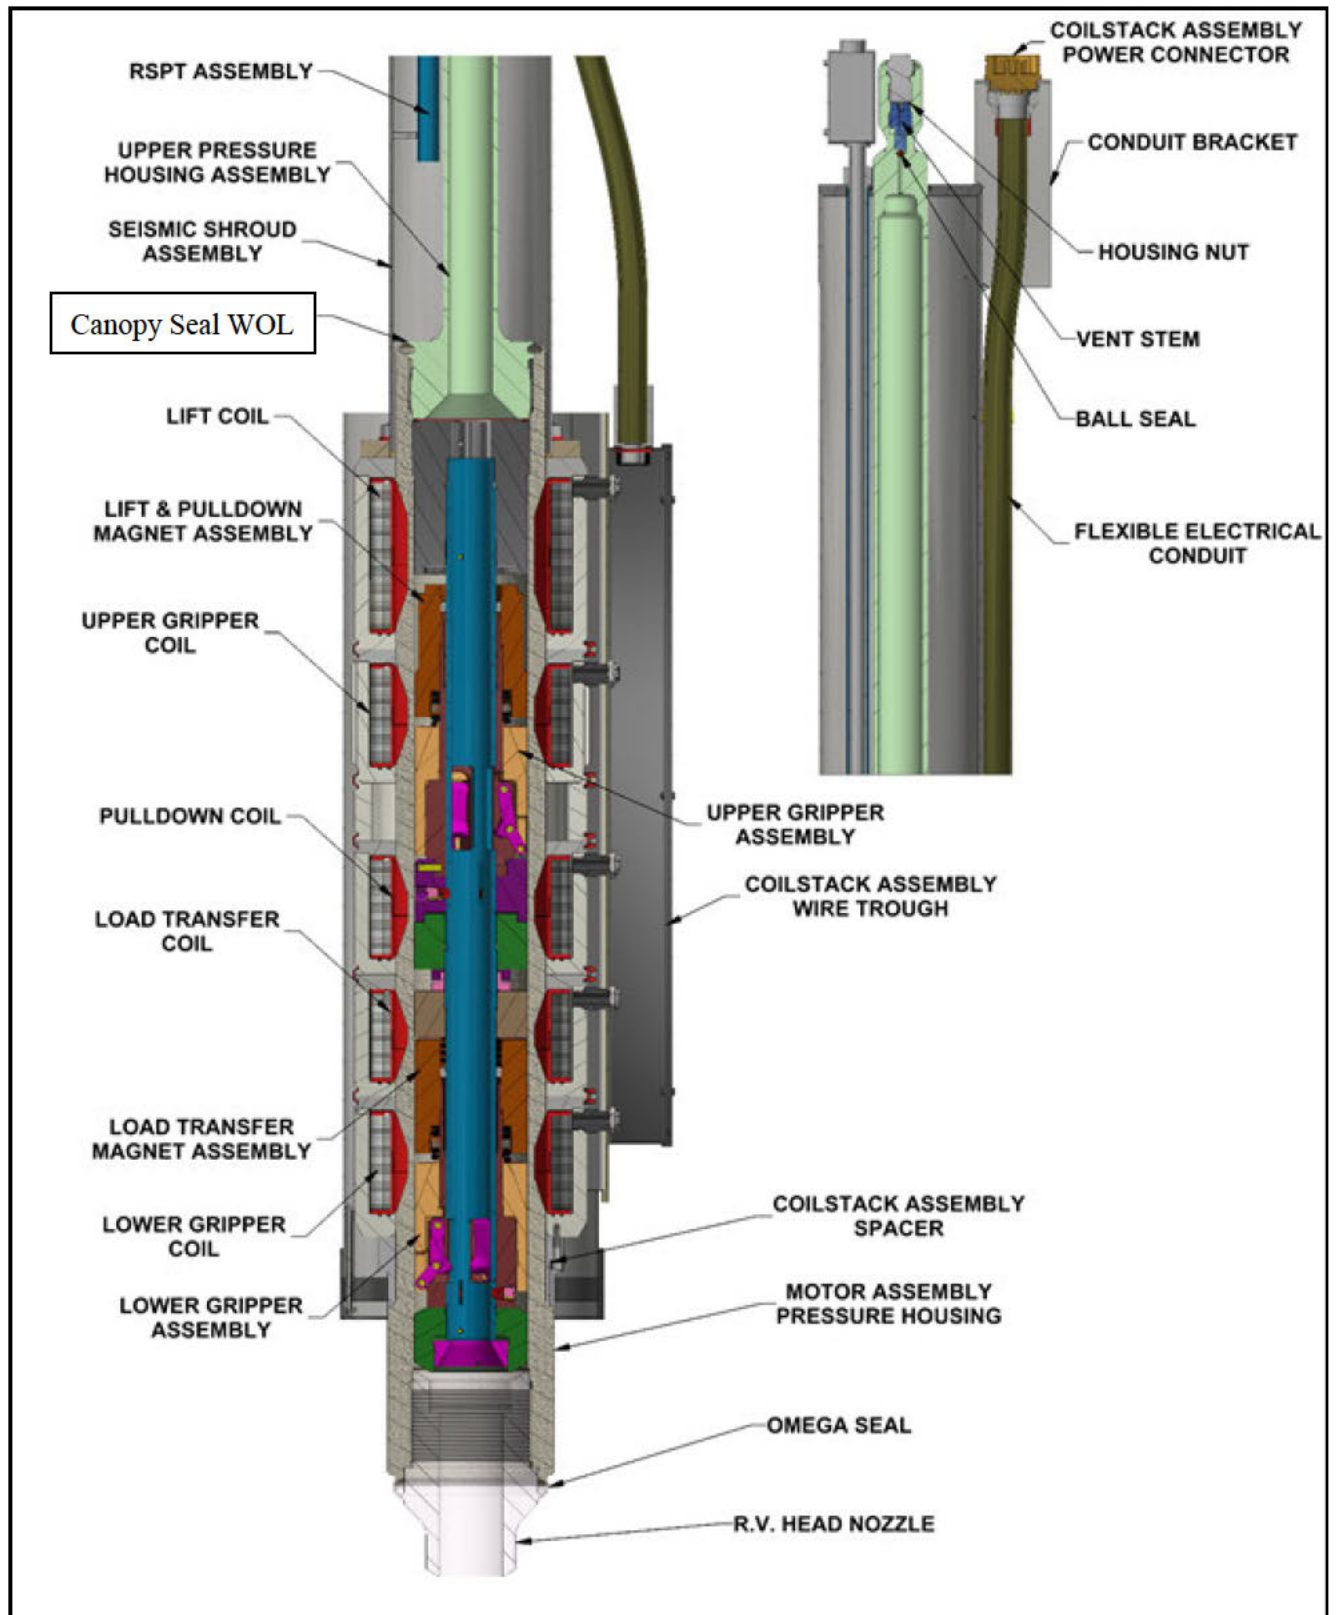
Control Element Drive Mechanism-Shroud Assembly Illustration
